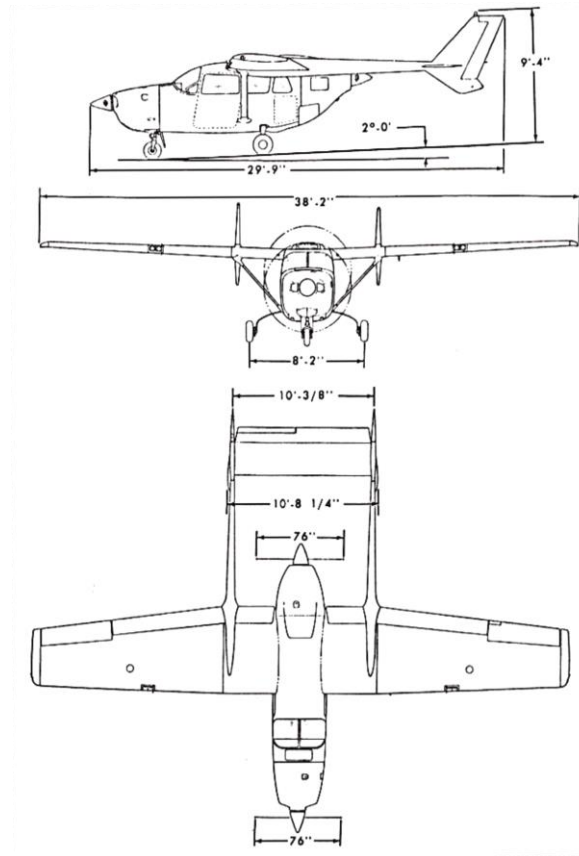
Three-view dimensioned schematic of the Cessna O-2A Skymaster (Carpenter [7])
